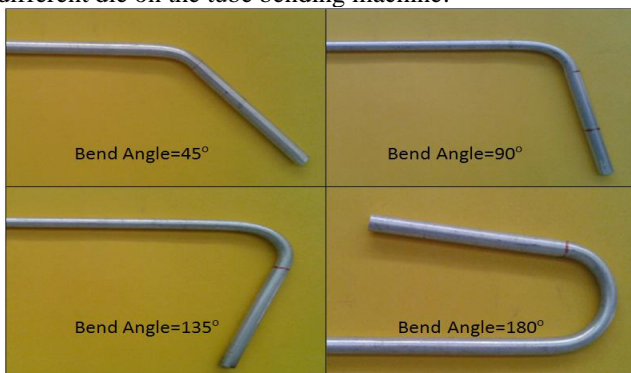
Tube Bends For Different Angle For Bending Radius 30mm
